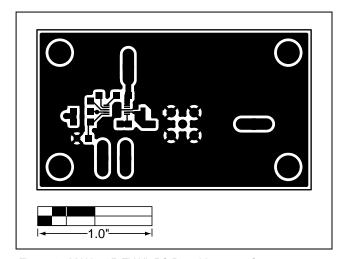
MAX881R EV Kit PC Board Layout—Component Side
